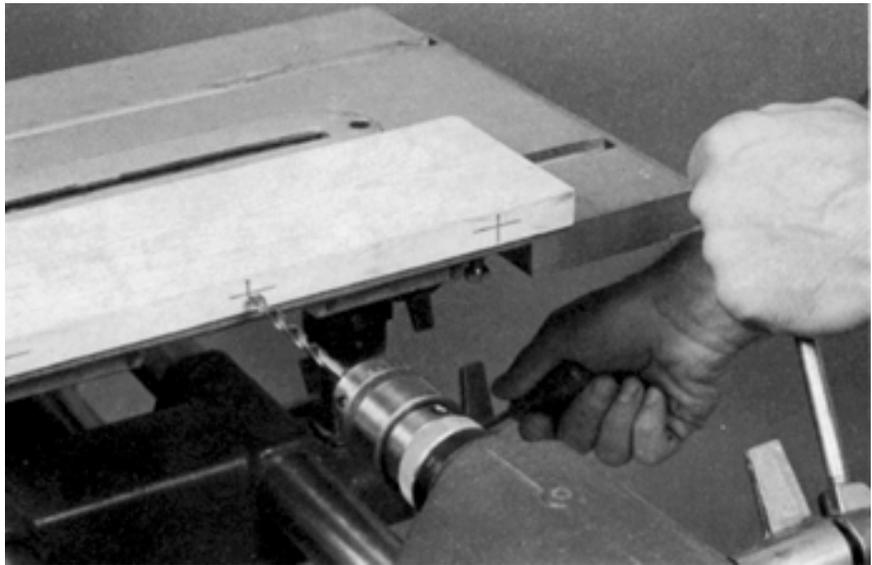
Before boring, extend the quill with the machine turned off to be sure the bit will bore a hole where you want it.
